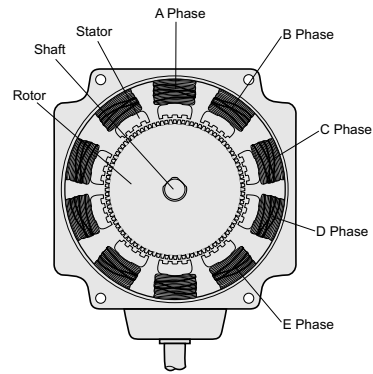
5 Phase Stepping Motor Cross-Section Perpendicular to Shaft
